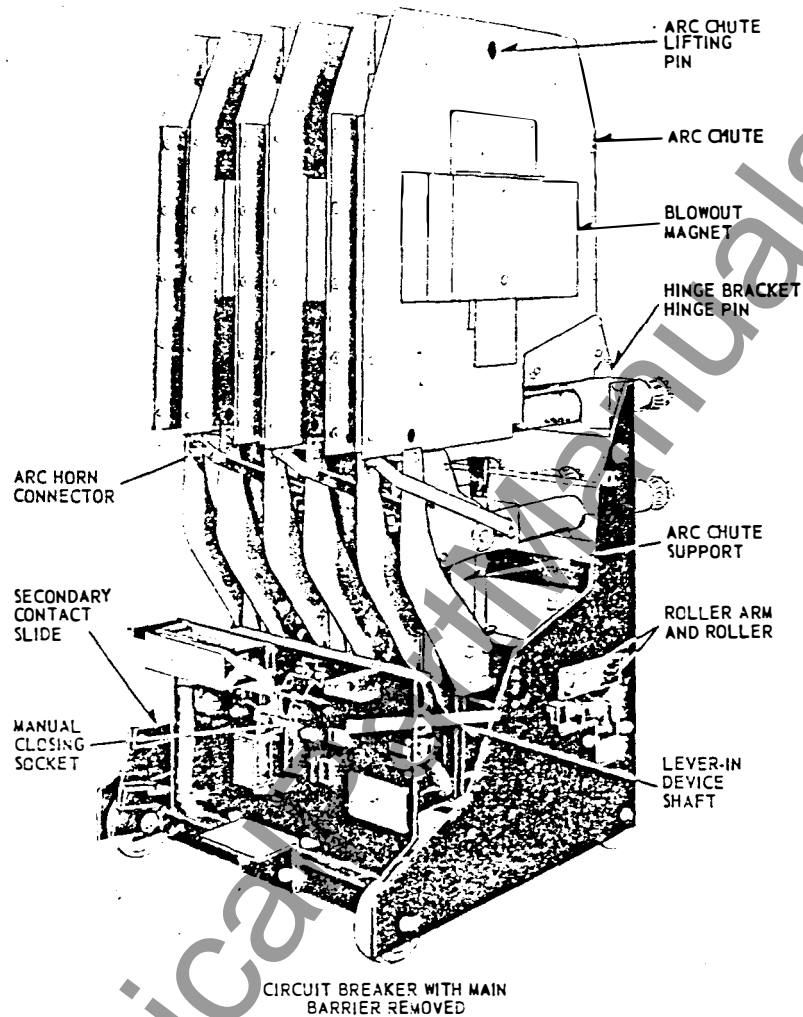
CIRCUIT BREAKER WITH MAIN BARRIER REMOVED
